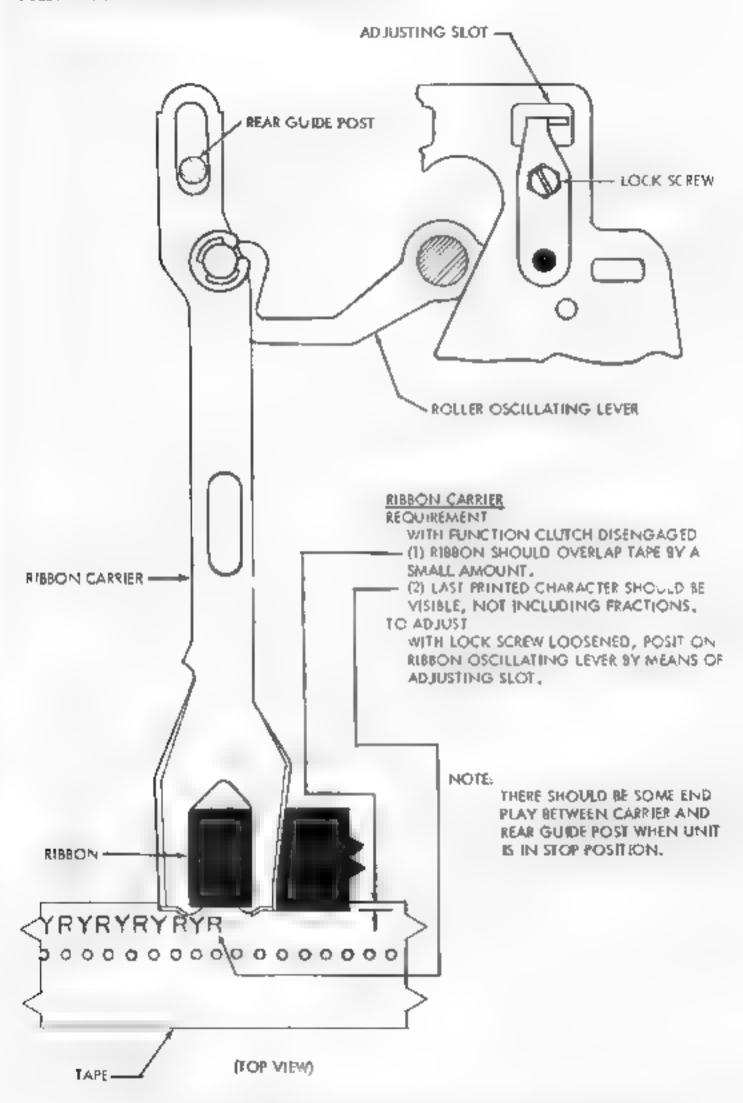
RIBBON OSCILLATING MECHANISM FOR CHADLESS TAPE
